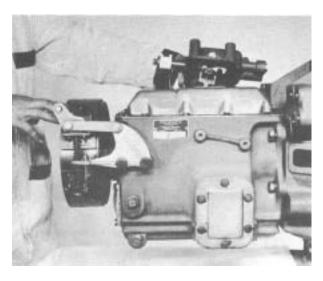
Install remove control or shift control top, tighten bolts 20 to 25 ft. lbs. torque [27,2 - 33,8 N.m.].
